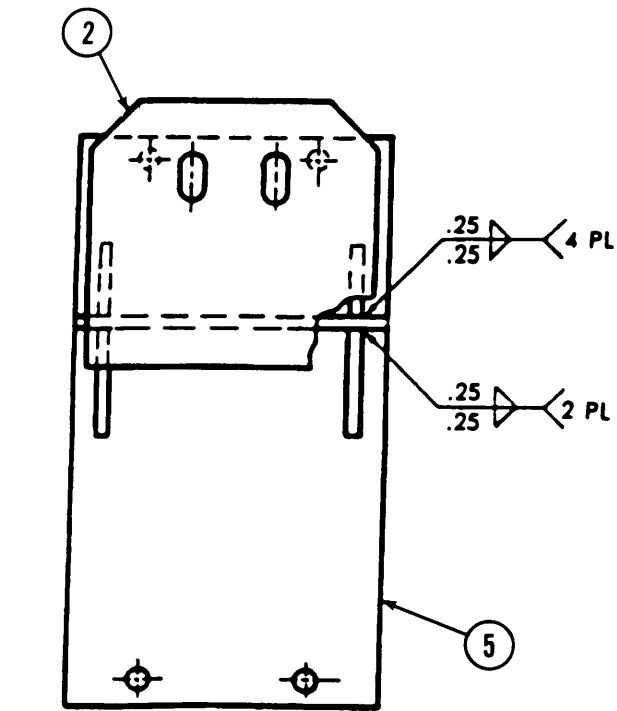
Projectile Rack Section Test Stand-Bracket Weldment
